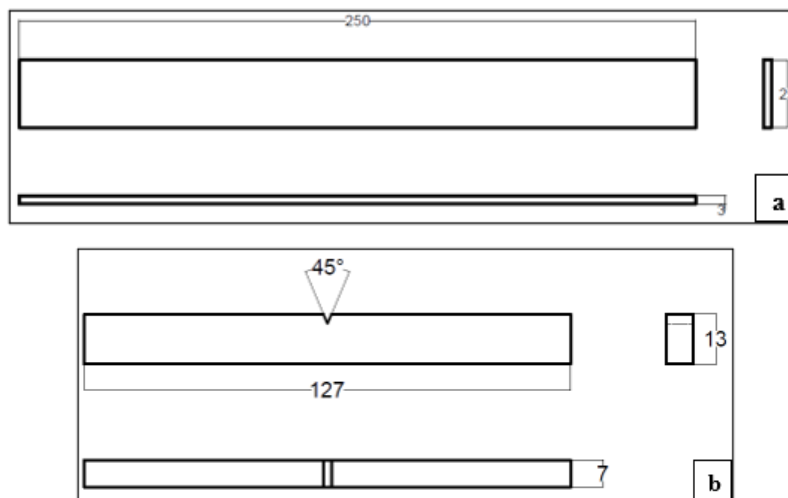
(a) The dimensions of tensile test specimens in mm, (B) The dimensions of impact test specimens in mm [15,16].
